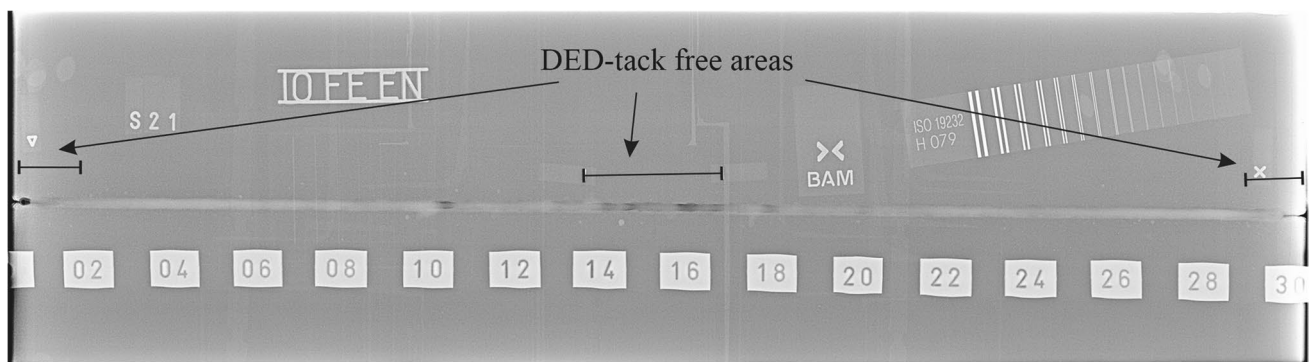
X-ray image of weld seam with DED tacking
